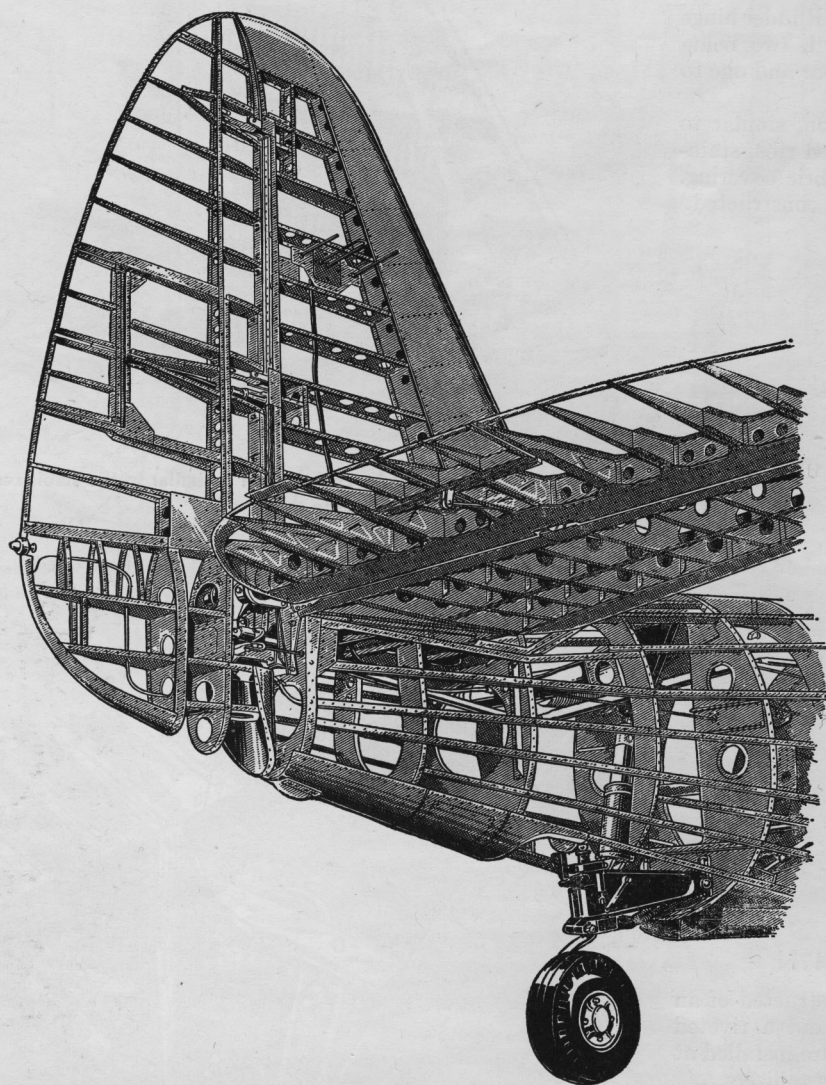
Skeletonized view of the Republic P-47N Thunderbolt empennage, revealing the structure of fin and rudder, stabilizer, and elevator, including aft fuselage showing the installation of the retractable tail wheel. The metal skin is riveted. Fillets are provided at the roots of the fin and stabilizers.
